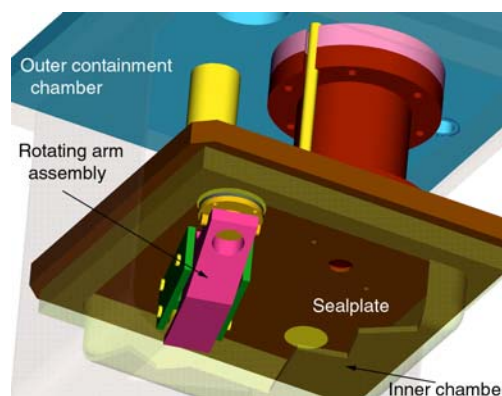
Bottom cutaway view of the inner and outer chamber with seal plate, recoil chamber and rotating arm.
